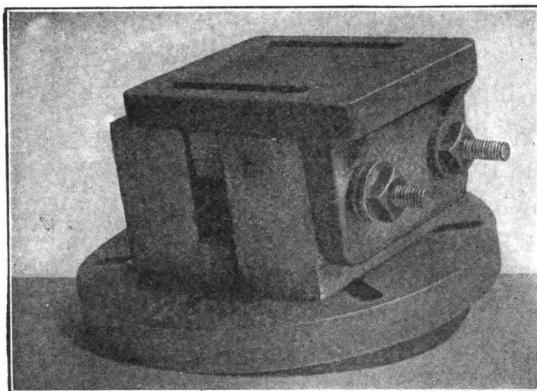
The use of blocks in mounting an angle plate to the face plate for machining
